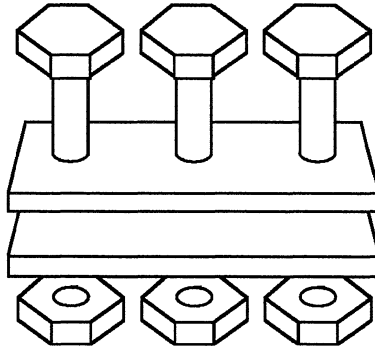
Example assembly consisting of 3 bolts holding together 2 plates.
